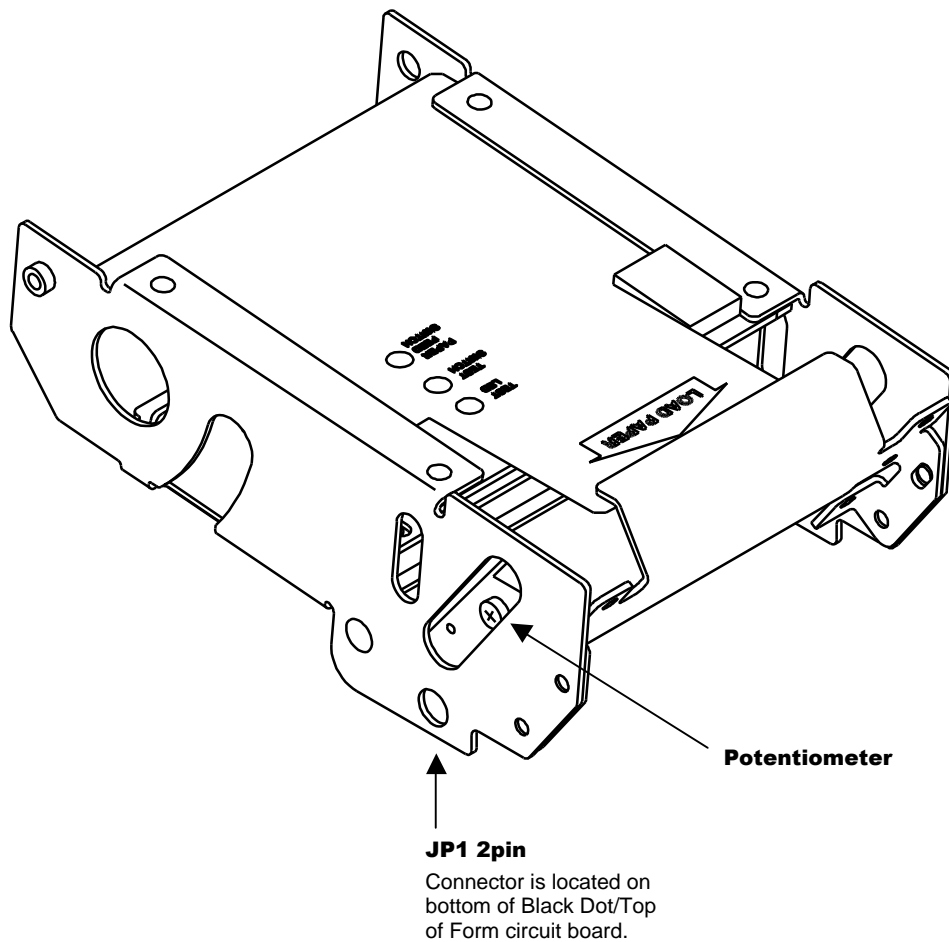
Black Dot Sensor Adjustment: Removing the Printer Chassis Assembly
